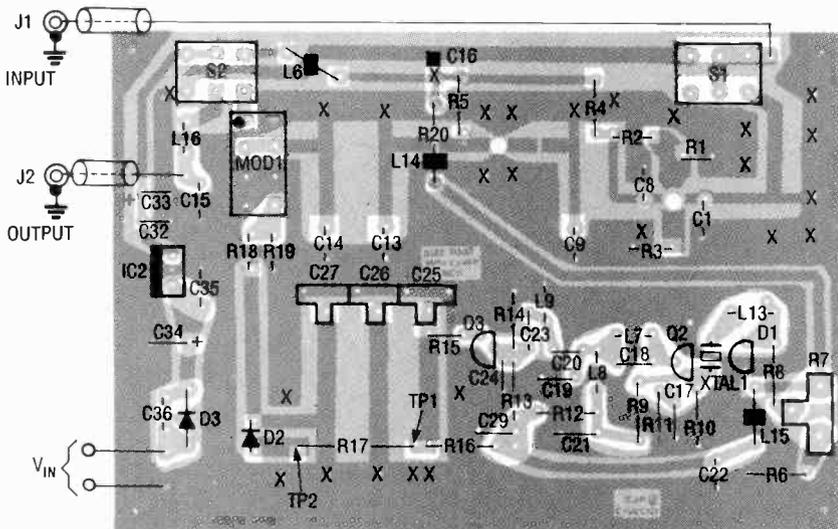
PARTS LAYOUT. Note that a piece of wire must be inserted and soldered on both sides of the board anywhere you see an "X." The chip components mount on the solder side as shown in Fig. 3.
